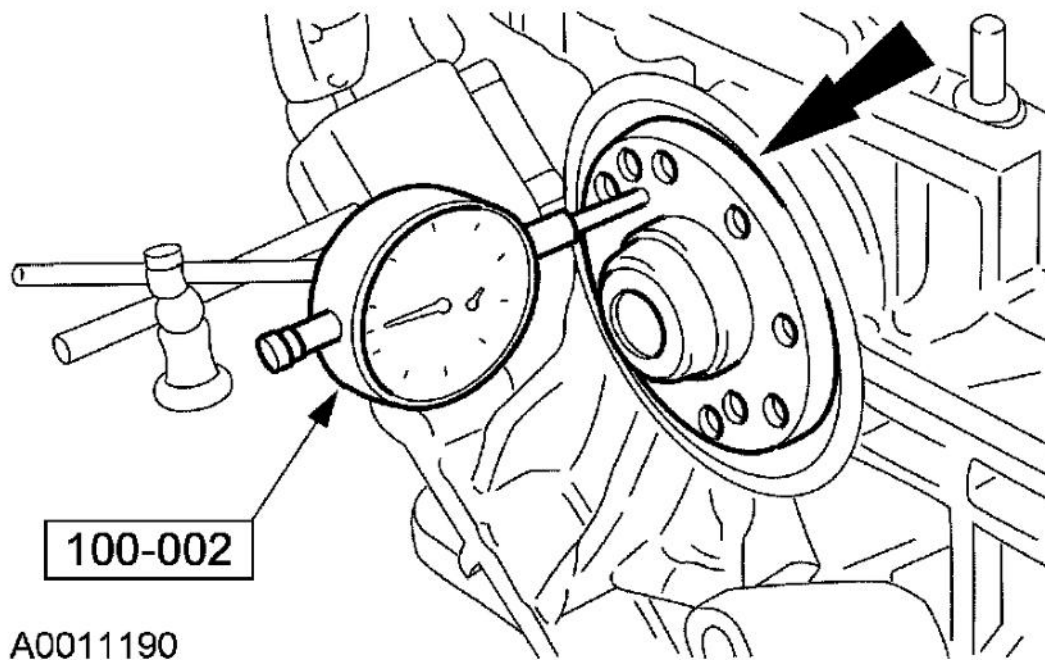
Measuring Crankshaft End Play Using Special Tools
